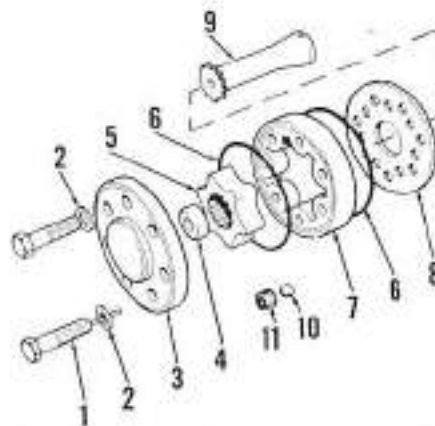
Exploded view showing steering valve rotor set, drive shaft and related parts.
